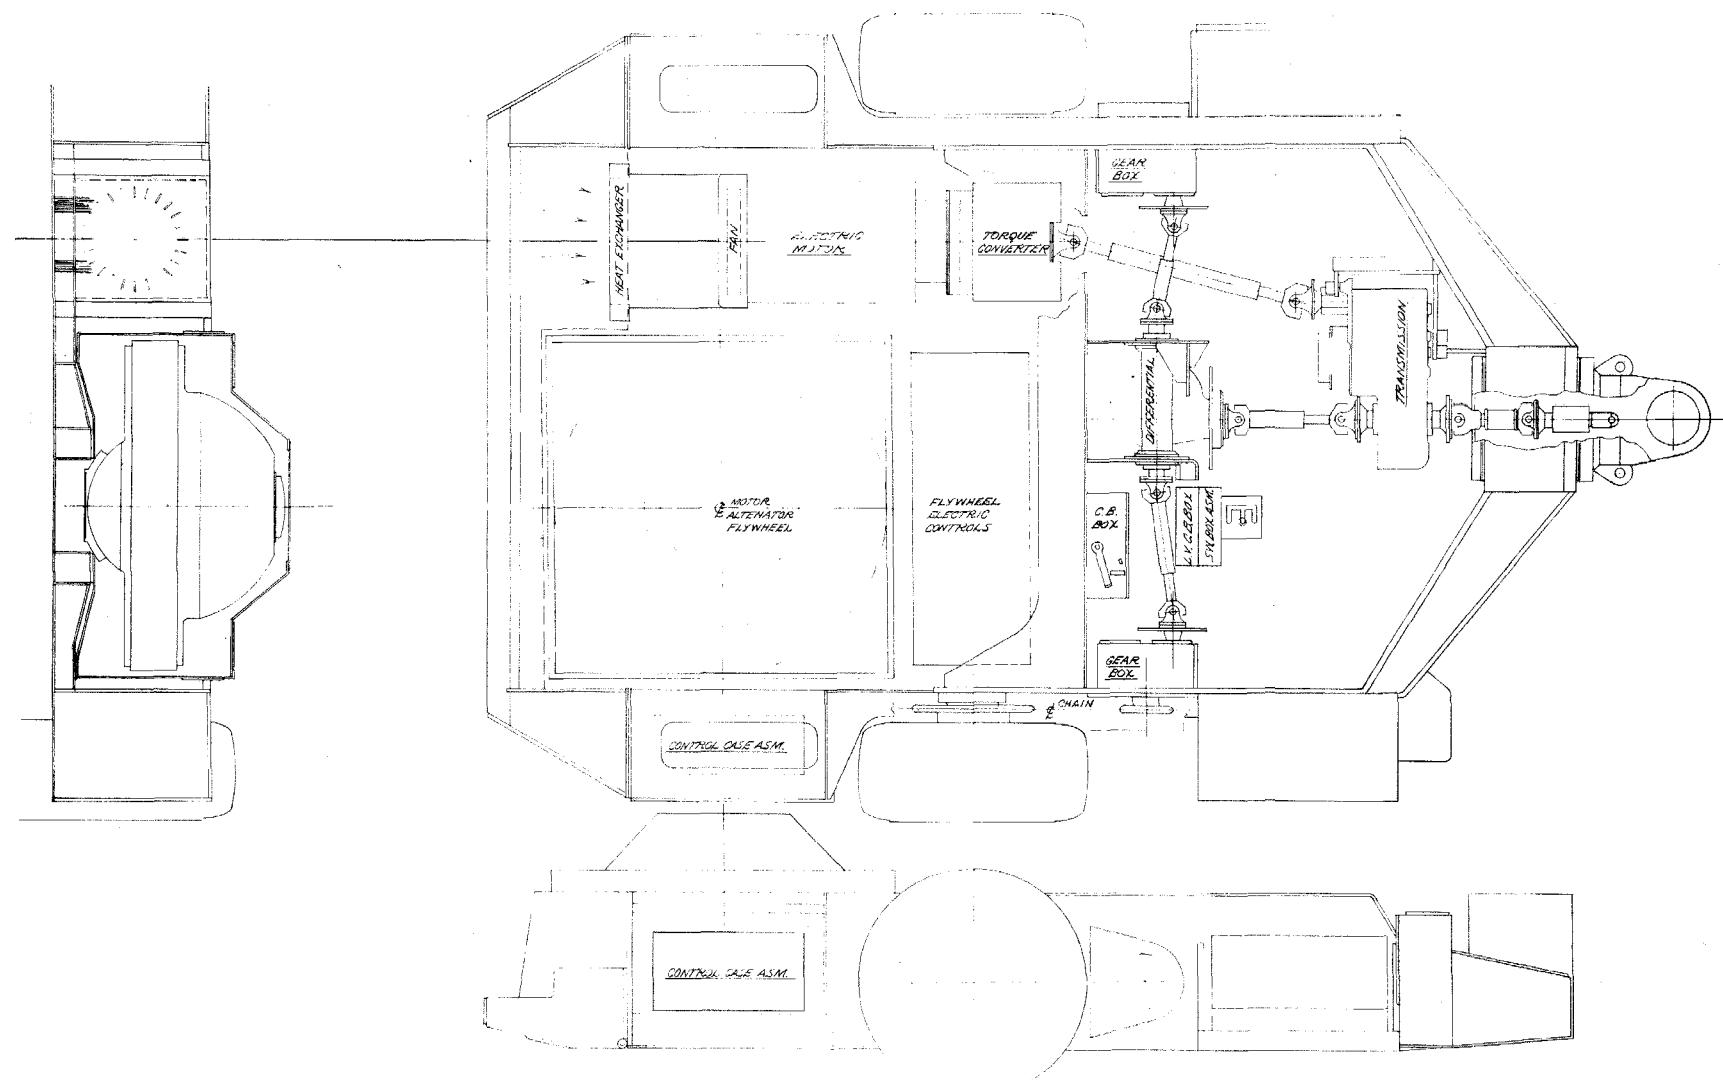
Preliminary Layout of Tractor With Flywheel Power
